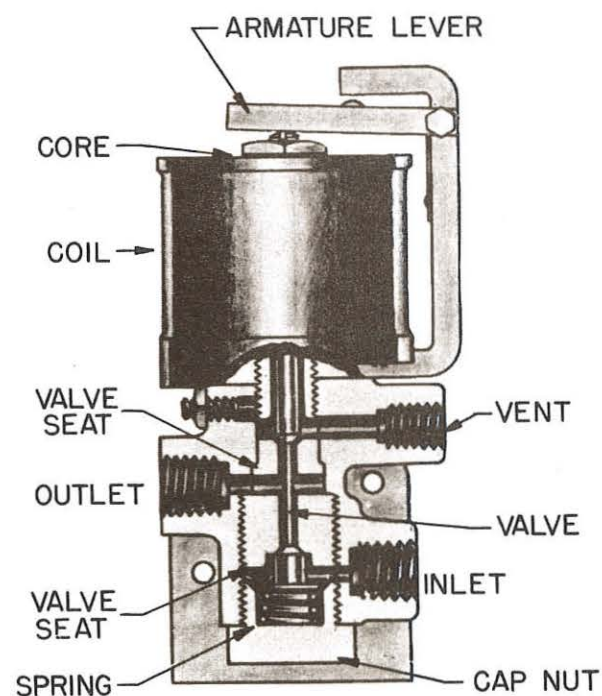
No. 7630-AA Pneumatic Control Valve.
